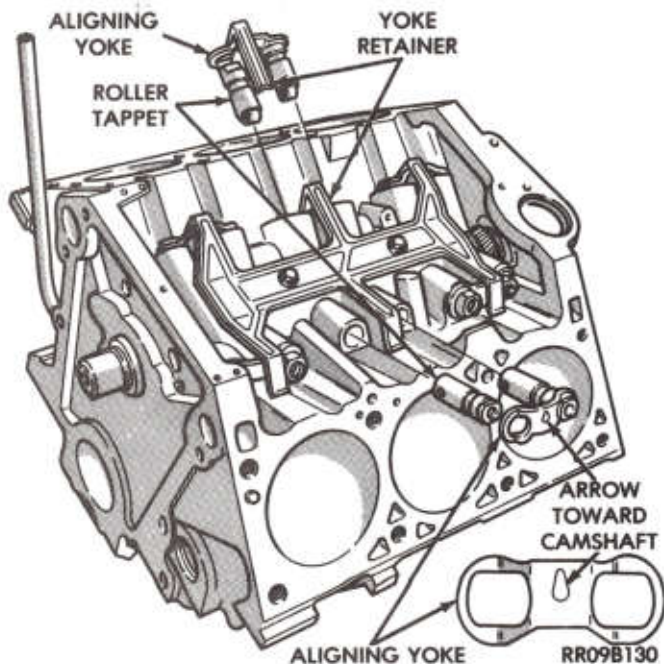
Roller Tappets Aligning Yoke and Retainer
